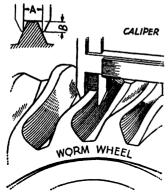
CHECKING WORM-WHEEL WITH TOOTH CALIPER
